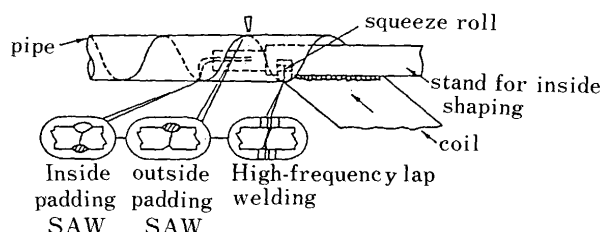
High-frequency welding and submerged arc welding.
